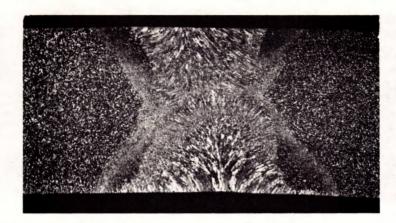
From weld specimen MR8. Gas metal-arc process, E70T-1 electrode, CO₂ shielding, flat position.
